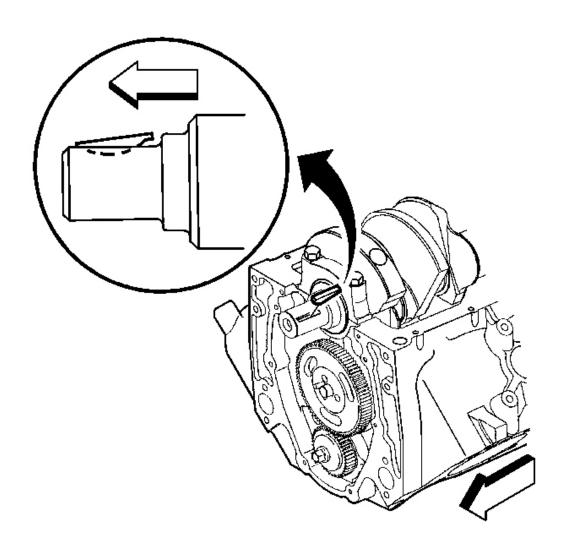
Locating Crankshaft Balancer Key Courtesy of GENERAL MOTORS CORP.
